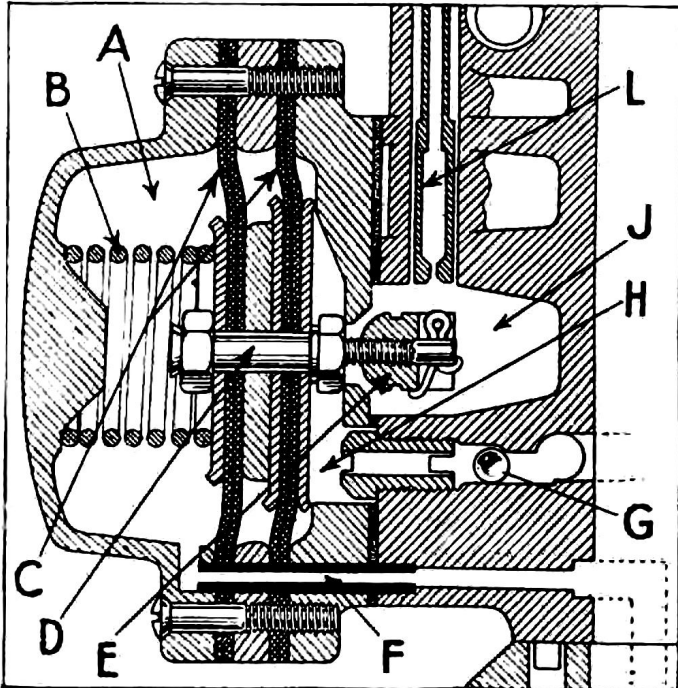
SECTION THROUGH CARBURETTER ECONOMY DEVICE.
